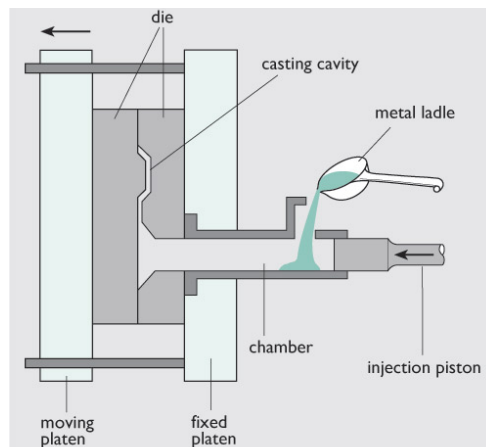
Schematic of a cold chamber high-pressure die-casting machine showing the molten metal being poured from a ladle into the shot chamber before being injected into the die [17].
